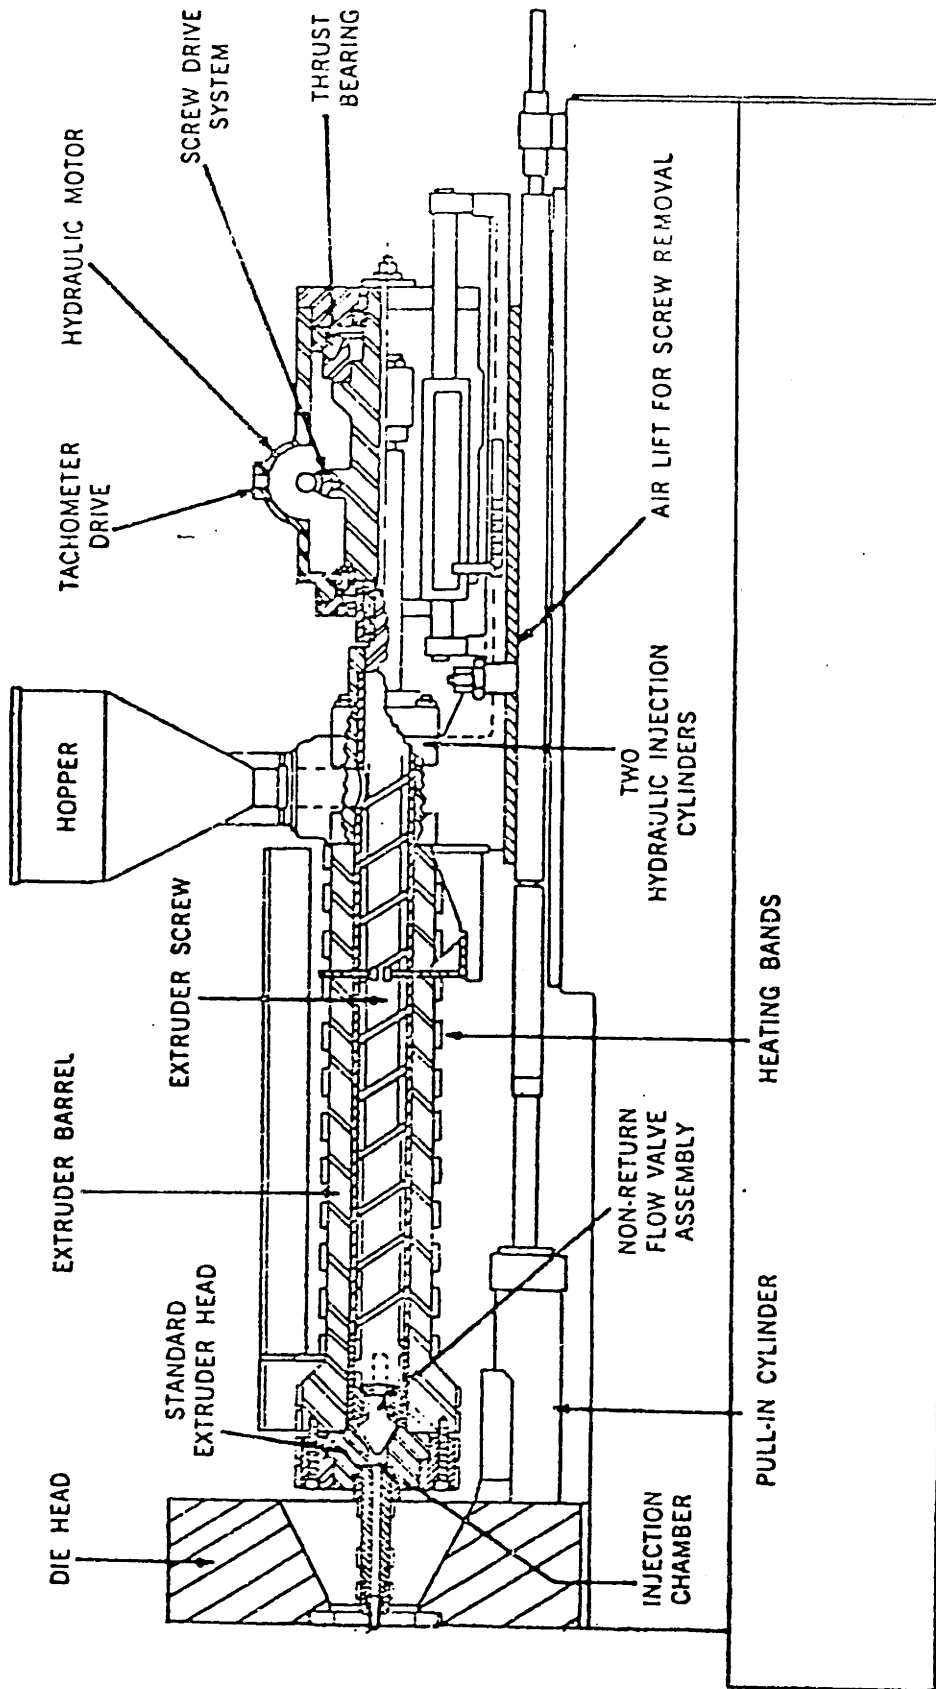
Schematic drawing of the injection end of a reciprocating screw machine. (Courtesy Van Nostrand Reinhold Company)
